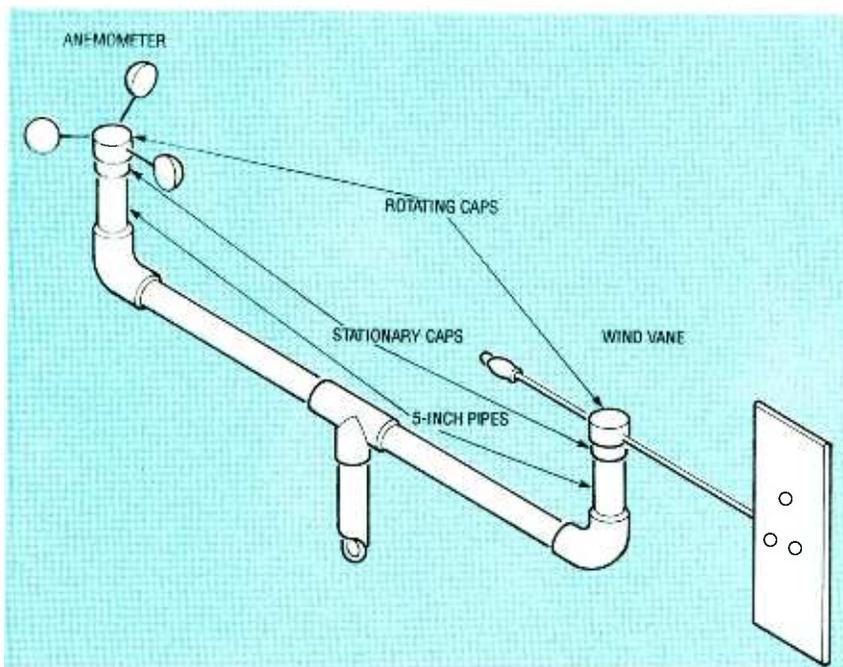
THE ANEMOMETER AND WIND VANE mount on a single PVC pipe assembly.
